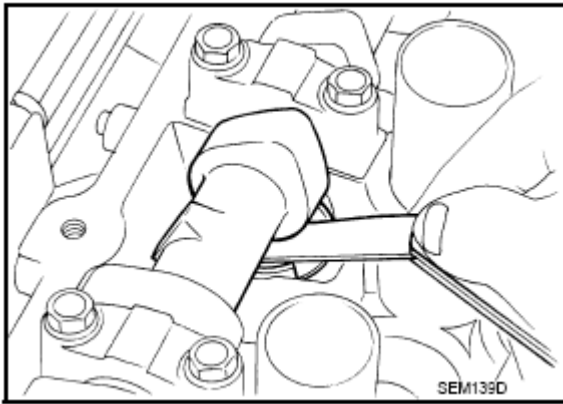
Checking Clearance Between Valve Lifter And Camshaft Using Feeler Gauge
